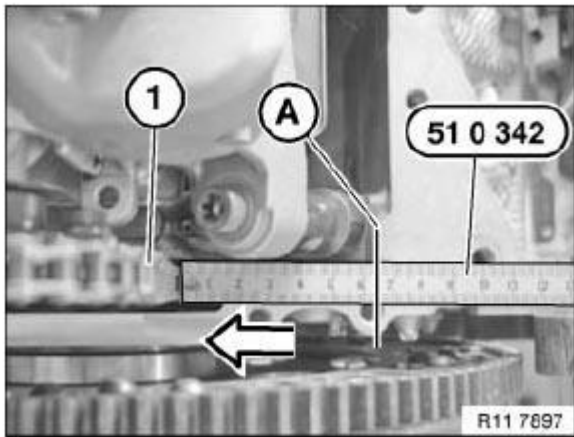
Identifying Pretension Timing Chain With Special Tool (51 0 342)
